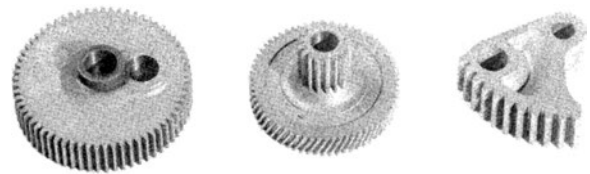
Sintered-iron gears used in an automatic washing machine.
